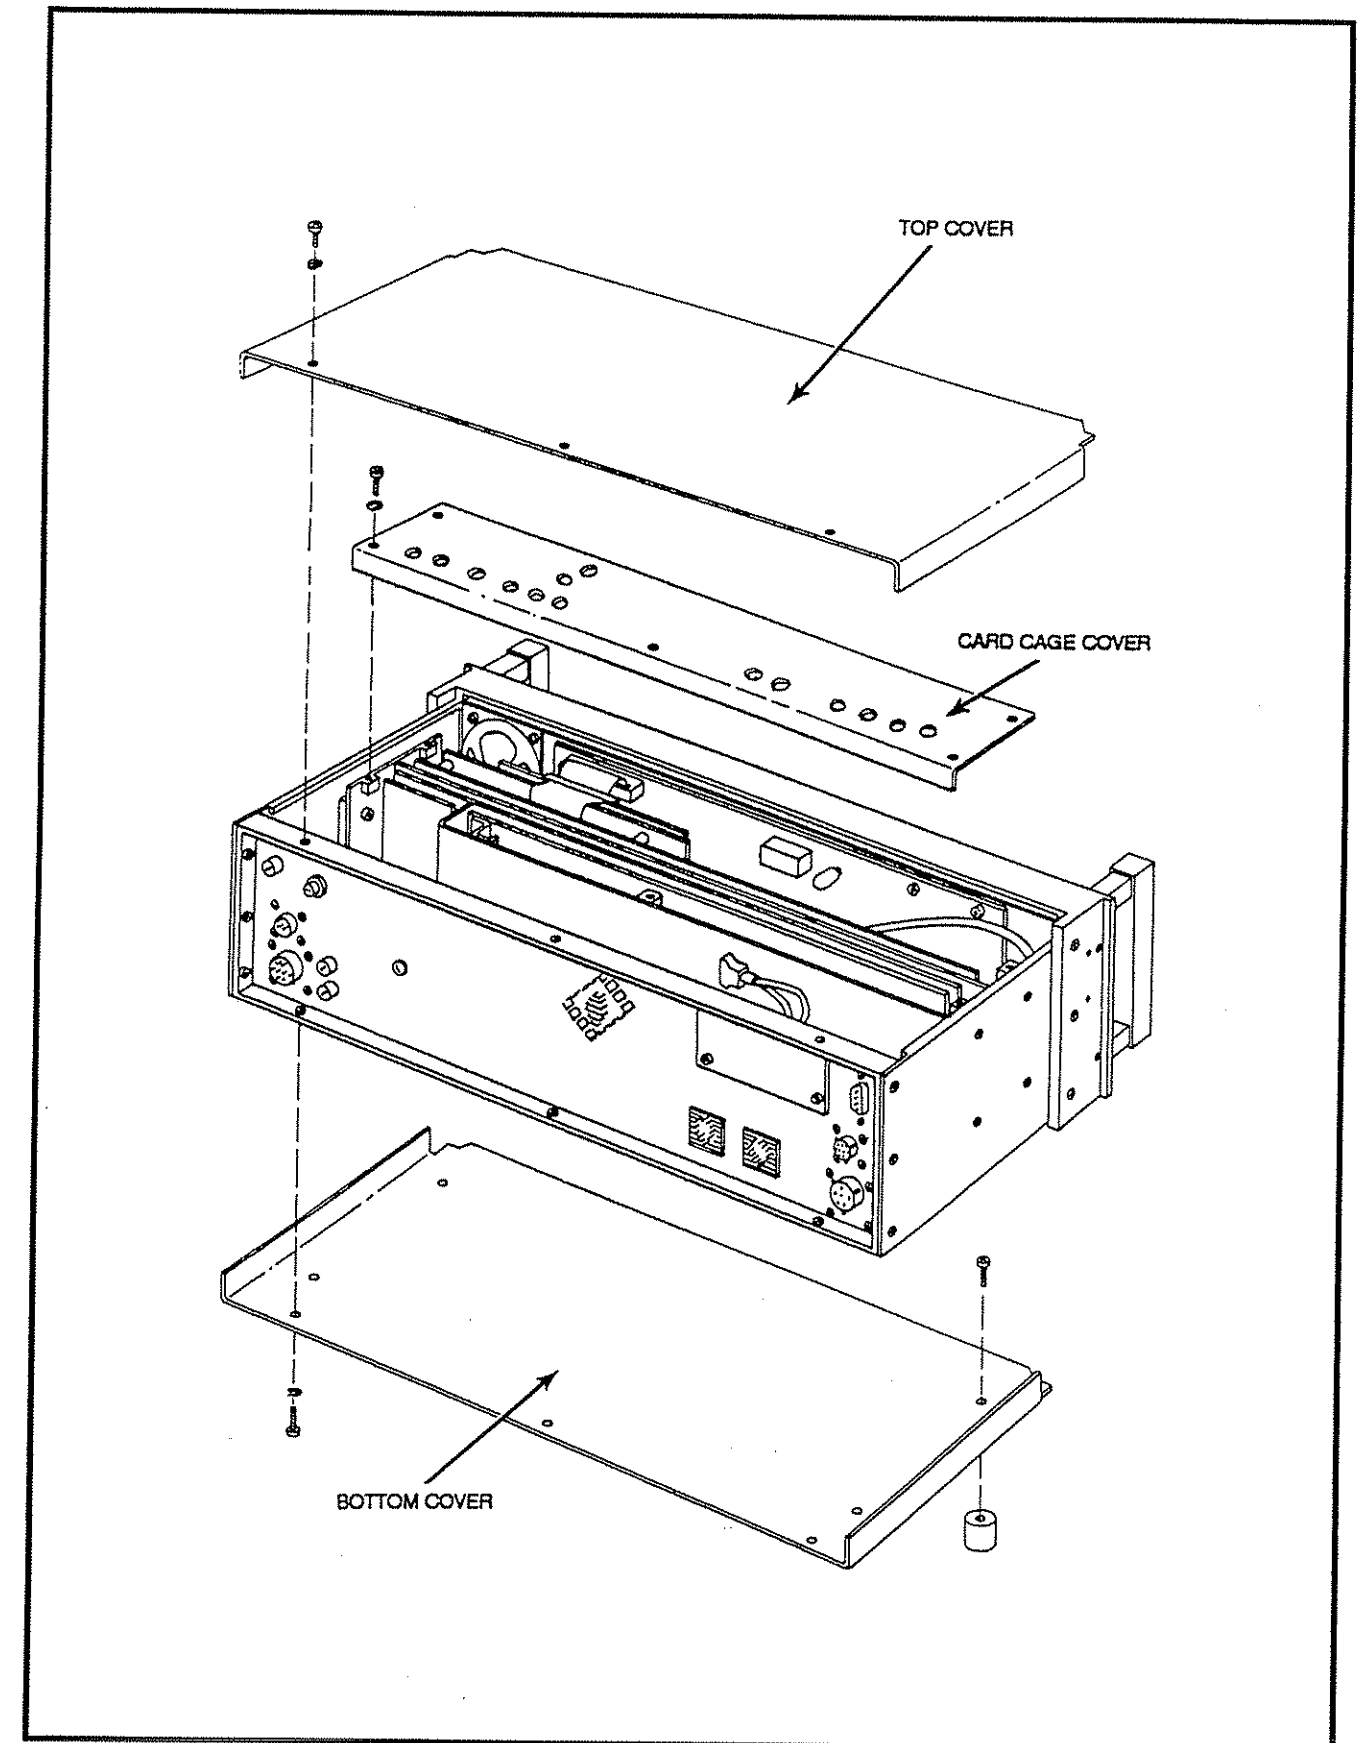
Top/Bottom and Card Cage Covers Removal.
